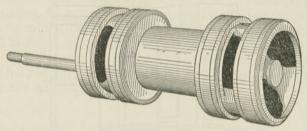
Hollow Piston Valve, Vauclain Compound Locomotive.
